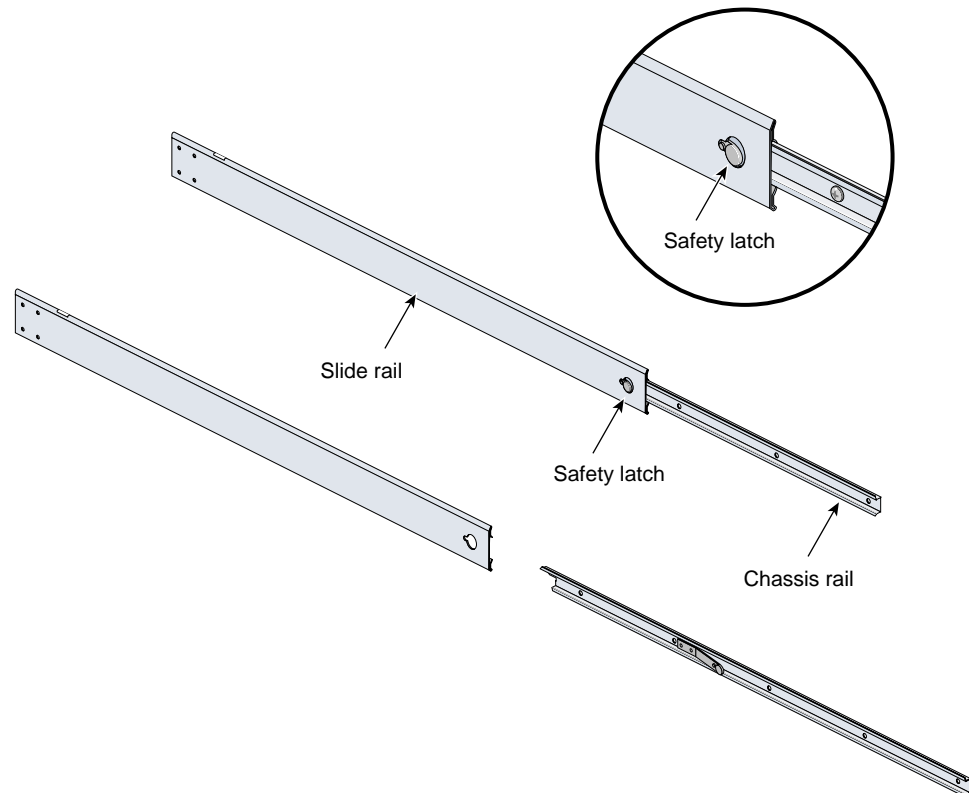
Removing the Chassis Rail from the Slide Rail
